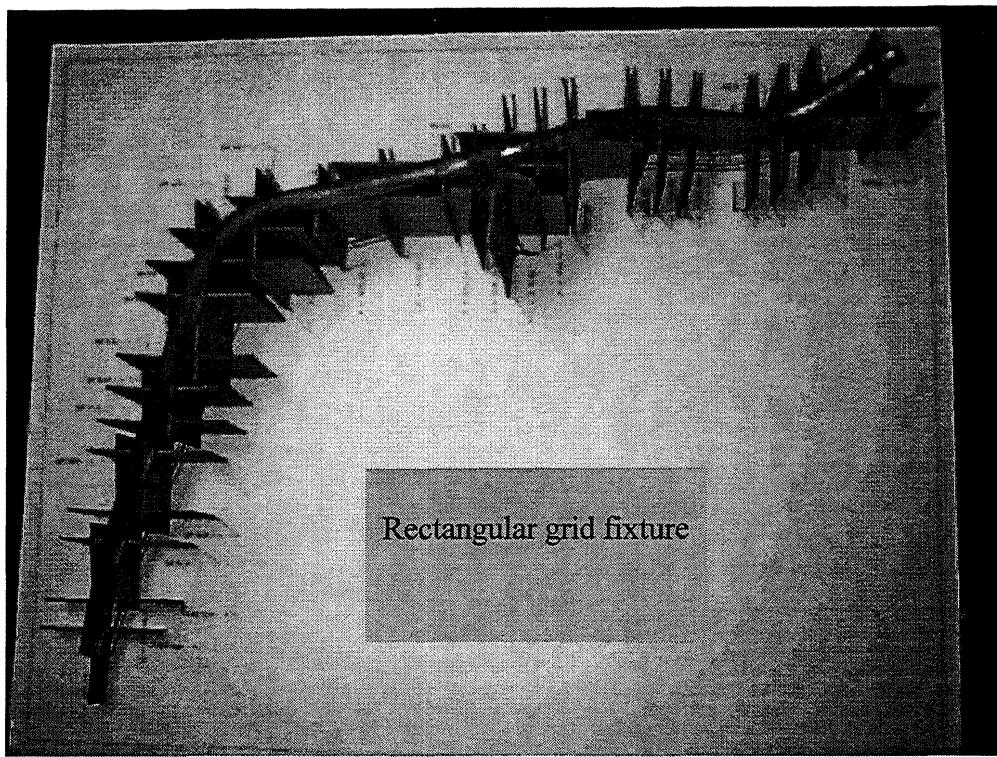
This figure shows the complete assembly of the Rectangular Grid fixture with the part mounted on it.
